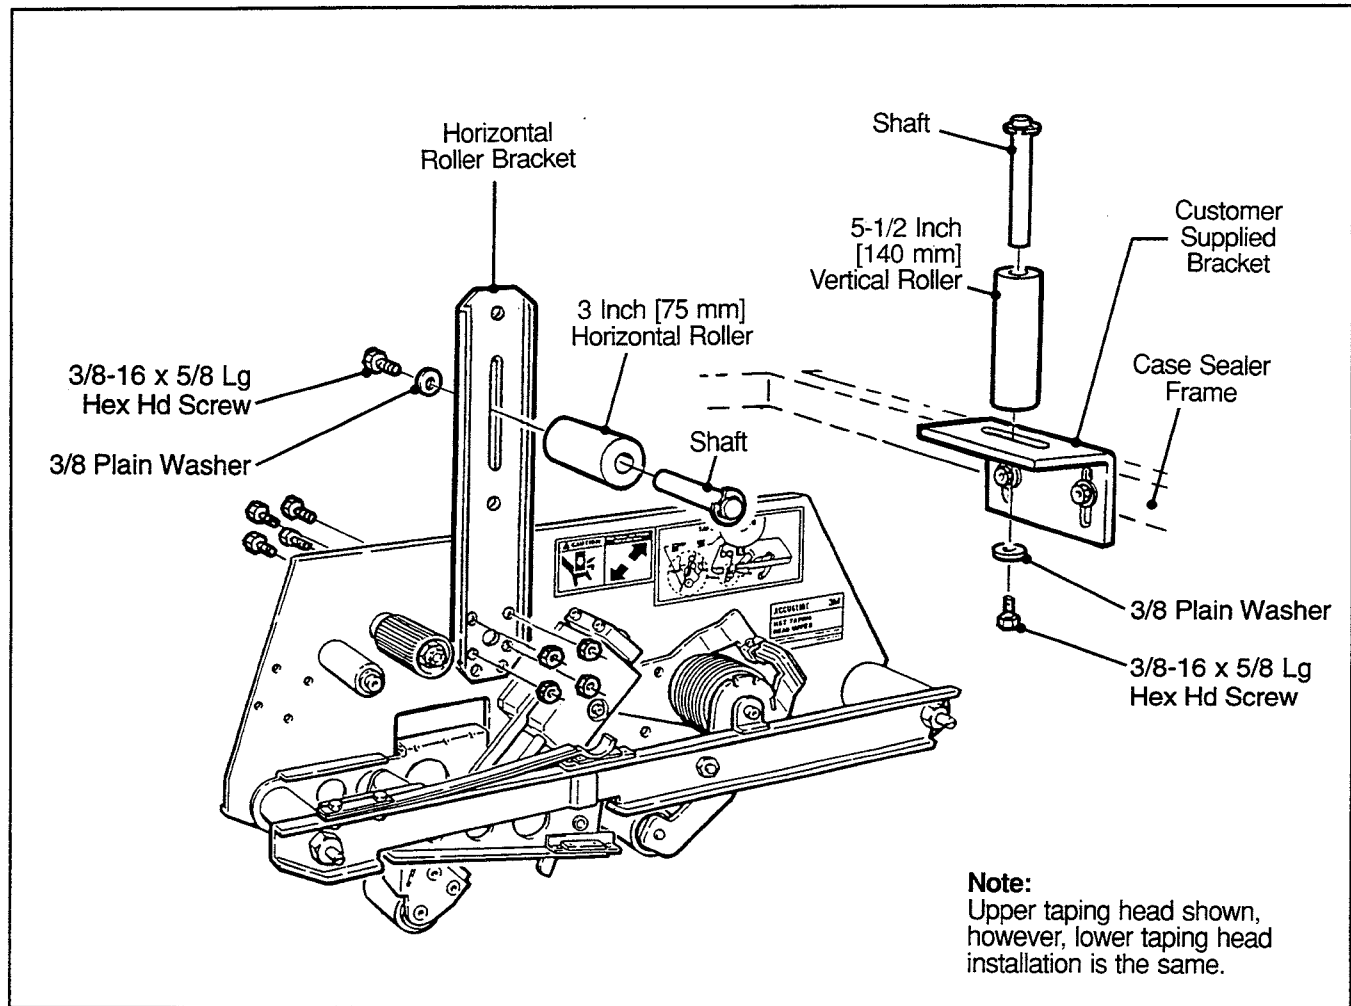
AccuGlide™ HST Taping Heads, Upper/Lower
